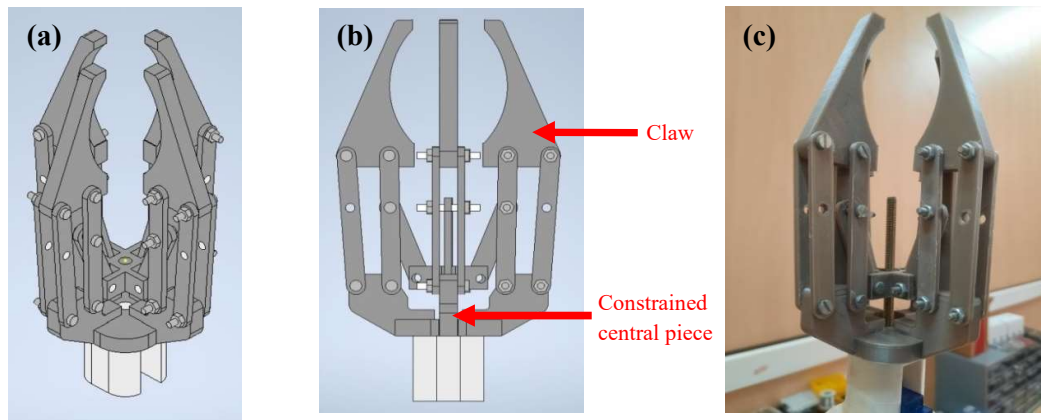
Illustration of the four-claw-gripper – (a) Isometric view; (b) Side view; (c) Picture of the four-claw gripper with its driving bolt
